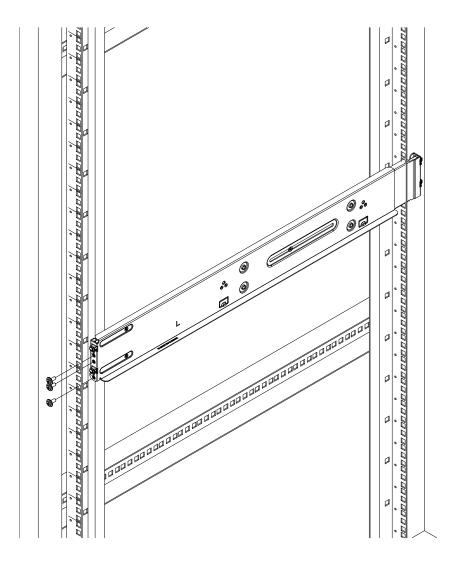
Attaching the Rail Front to the Rack (Left rail shown)
